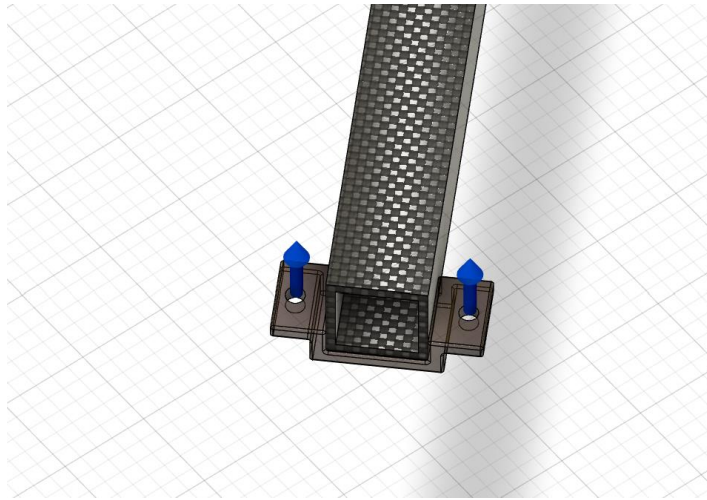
Hovering - Thrust force applied onto the lower mounting threads.
